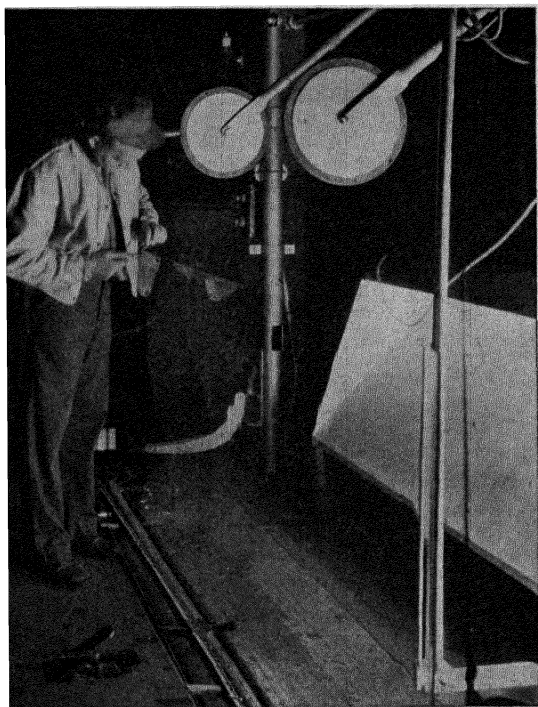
(d).—Testing the glass for uniformity. (Courtesy Pittsburgh Plate Glass Co.)
